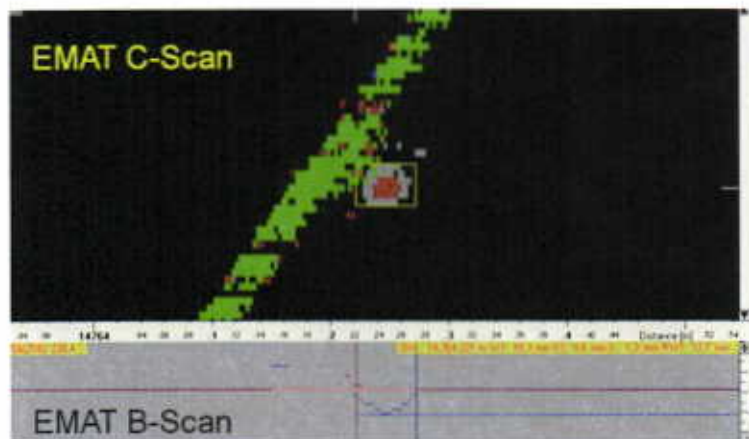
Feature identified and sized close to the spiral weld in a gas pipeline
